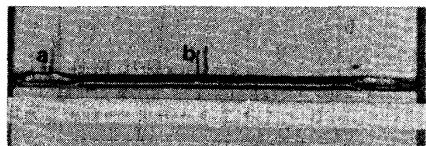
Typical weld bead appearance of DC butt welding
